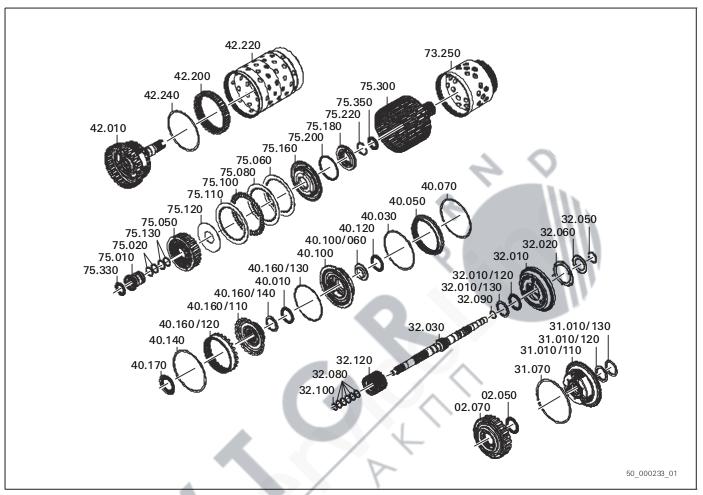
31 - Planetary gearset 1, 32 - Planetary gearset 2, 40 - Planetary gearset 3, 42 - Planetary gearset 4, 75 - Clutch C
